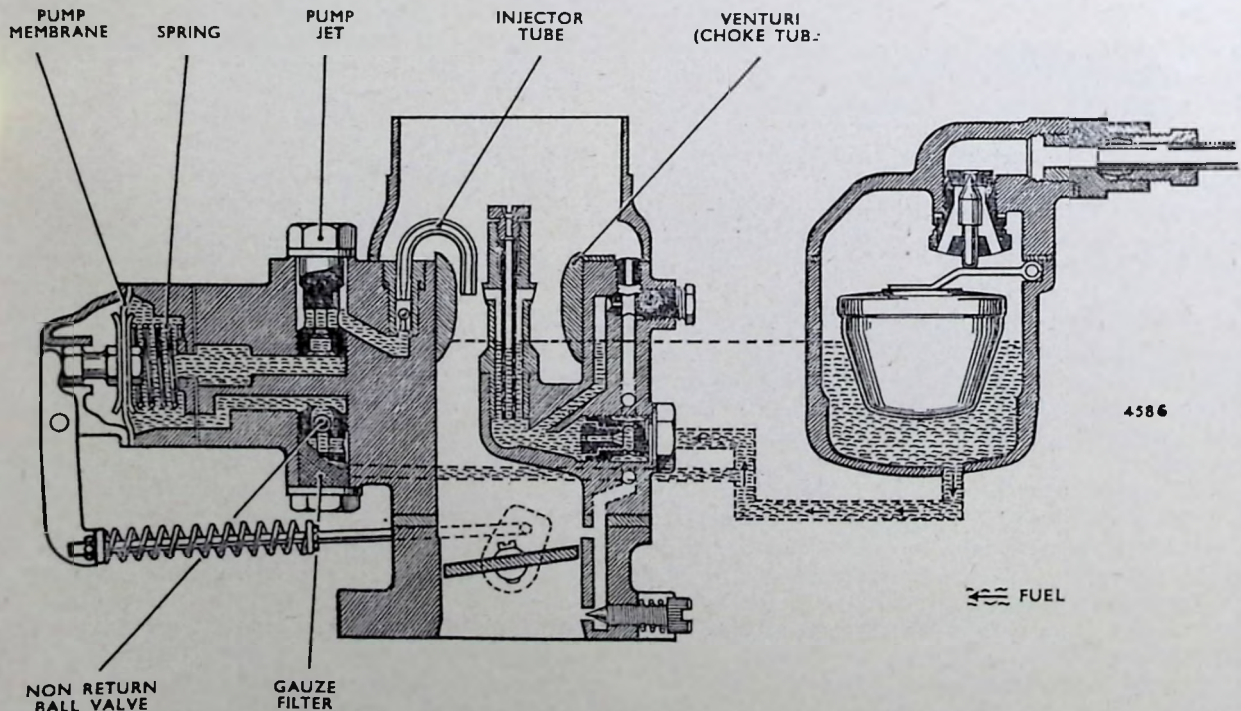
Sectional view of the B32 PB10-4 carburetter showing details of the accelerator pump. (Typical also of the 32 PBIS carburetter accelerator pump.)
